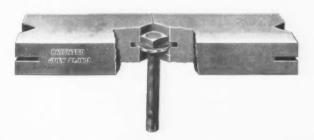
The Dies with Part Broken Away to Show the Position Taken by the Bolt.
